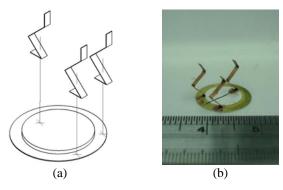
(a) Assembly and (b) the prototype of the MRV
